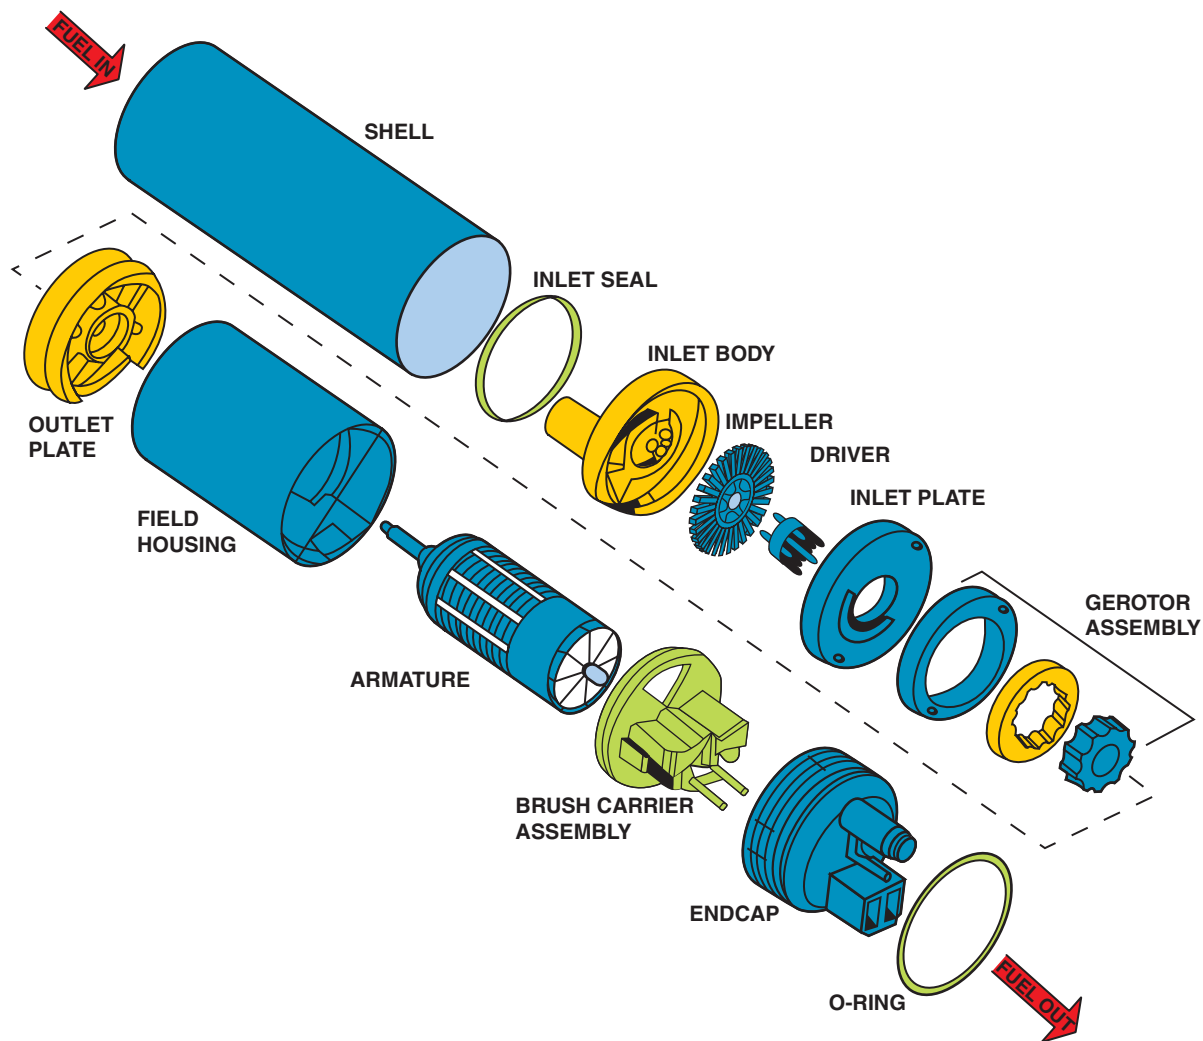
An exploded view of a gerotor electric fuel pump.
